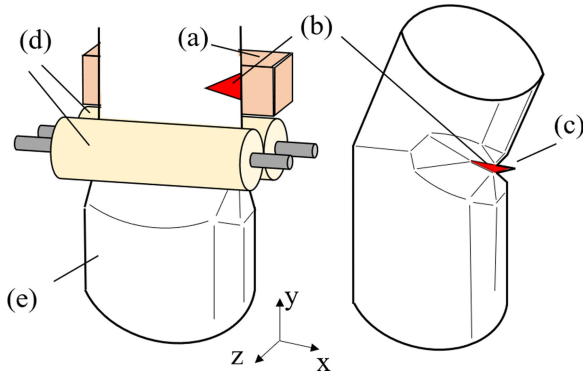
Overview of yaw-axis bending. The tube is welded before being inflated (left graph). Yaw-axis bending occurs at the welded point after inflation (right graph). (a) Part to modify the structure. (b) Welding point. (c) Bending point. (d) Rollers. (e) Tube.
